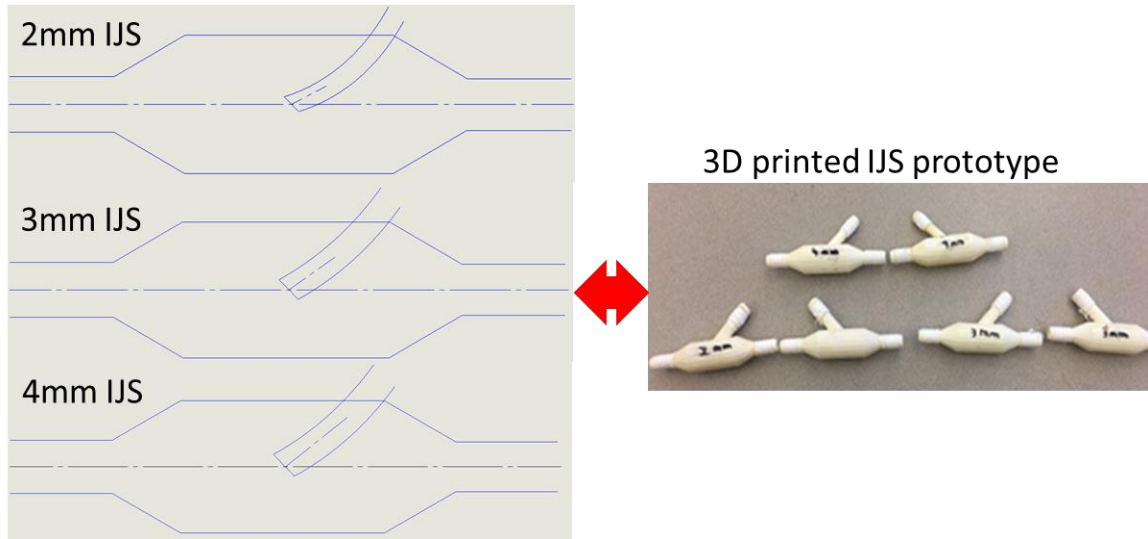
2D drawing of 2mm, 3mm, and 4mm IJS (L), 3D printed IJS prototype
